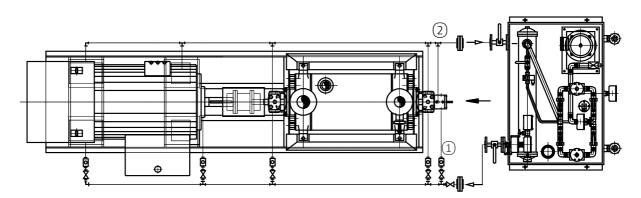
Lube oil system behind the pump, for lubrication of the pump bearings, or gearbox or electric motor bearings
